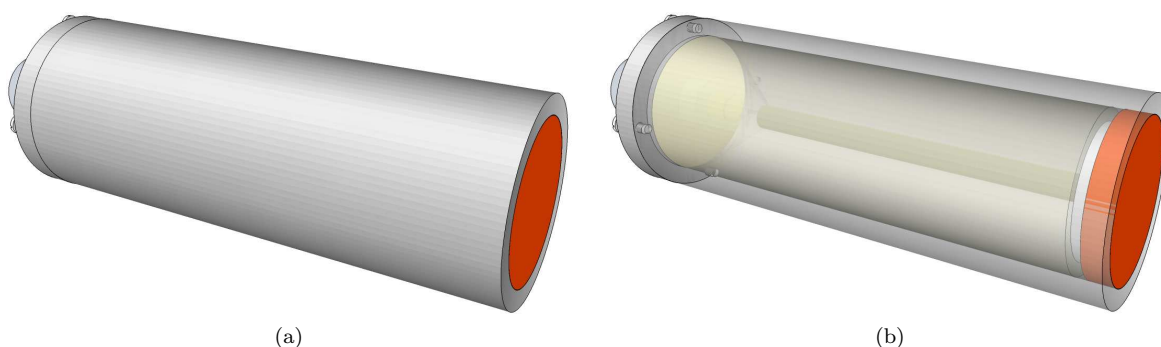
Sketch of (a) the assembled transducer and (b) transparent view of the assembled transducer.
